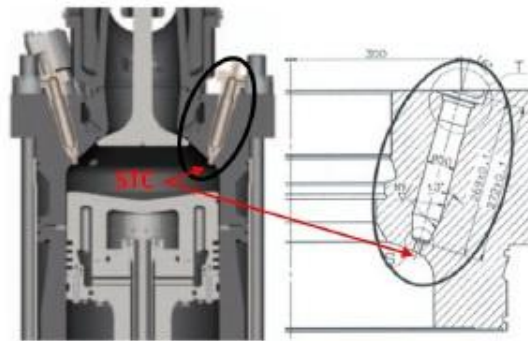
To the left is shown a sketch of the engine cylinder cross-section and the location of the surface thermocouple (STC). The picture to the right shows a zoom in on the fuel injector.
